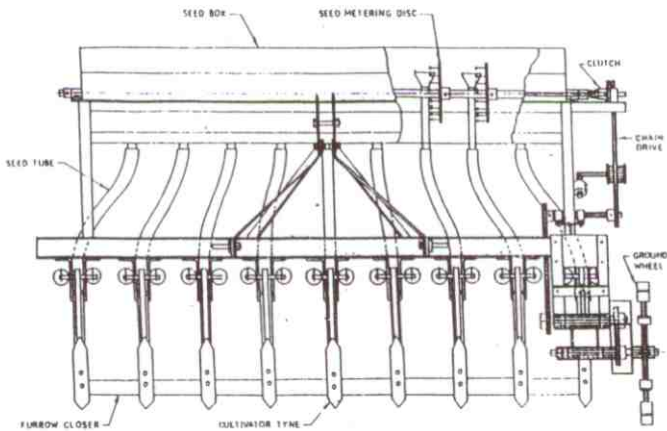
Schematic drawing of Tractor mounted cultivator seed planter (Modified)
